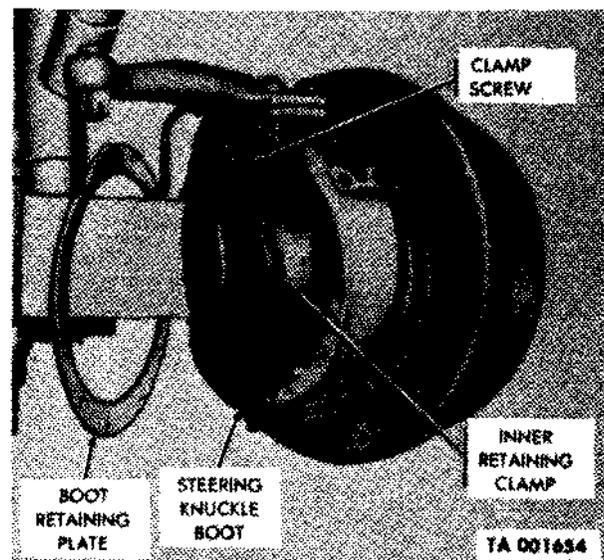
Steering knuckle boot removal and installation—inner retaining clamp.
